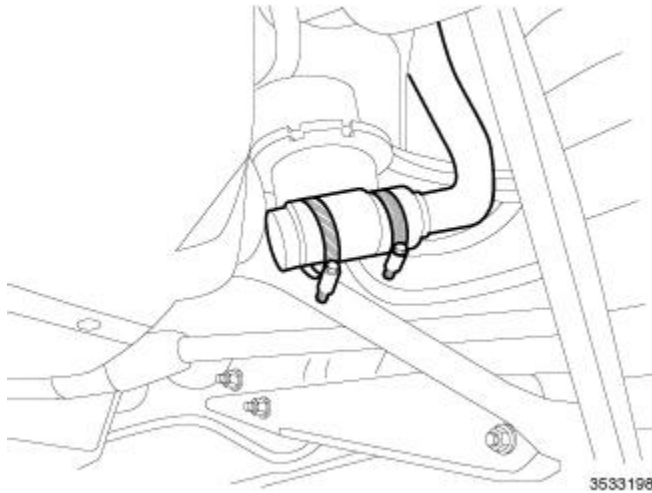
Remove/Install Fuel Filler Tube Rubber Hose
